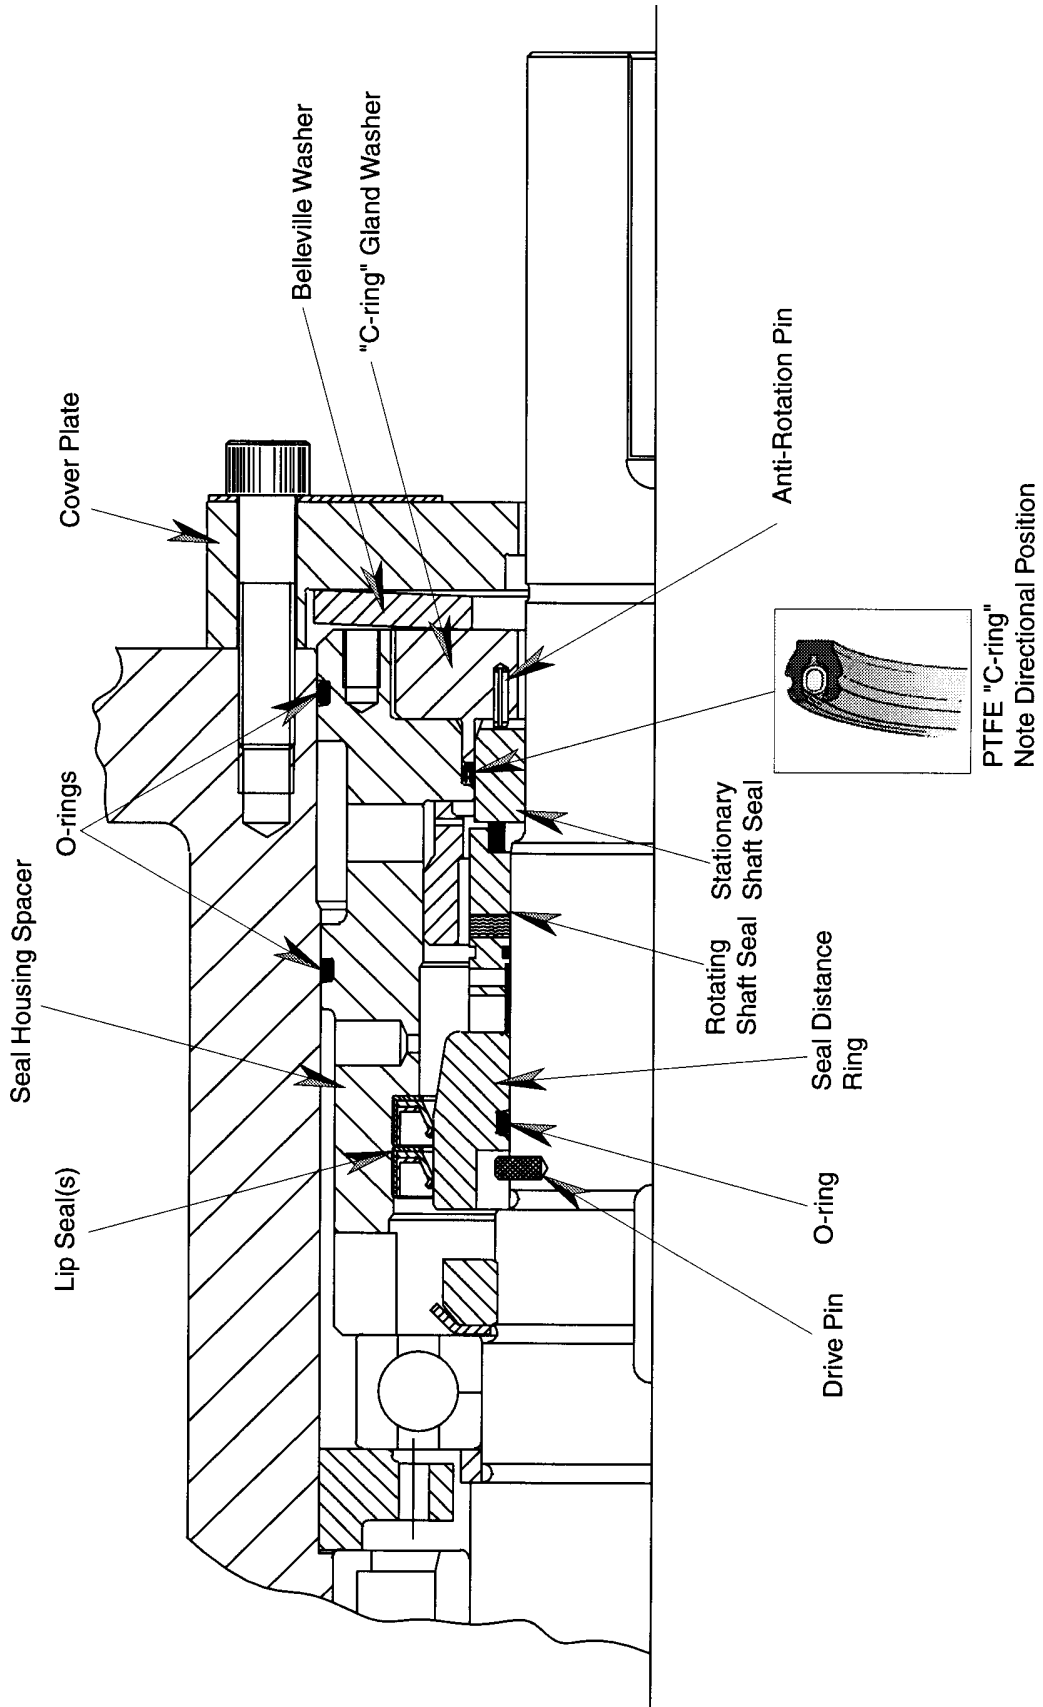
REVISION 3.0 SHAFT SEAL CROSS SECTION, CONTRACTOR/PRODUCTION VERSION
